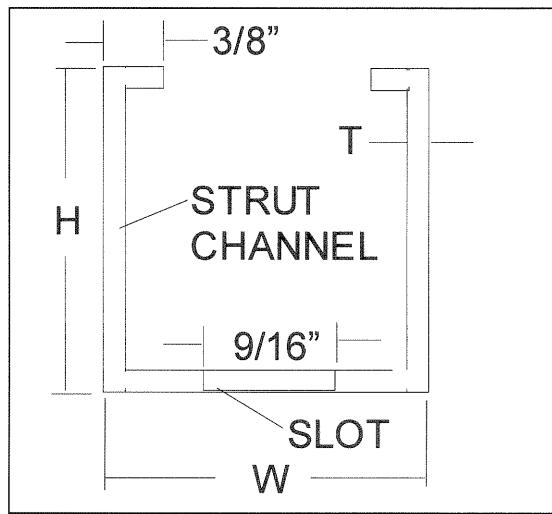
SECTION VIEW OF STRUT CHANNEL
